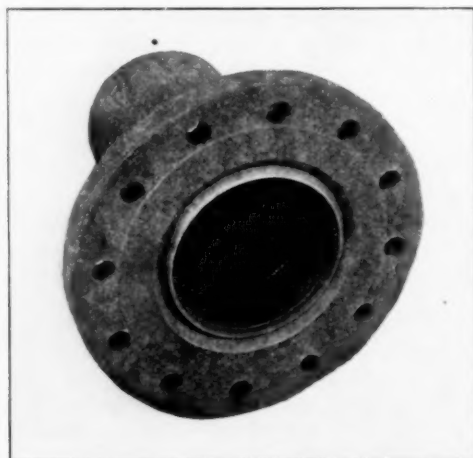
PIPE END AND FLANGE, READY FOR WELDING
